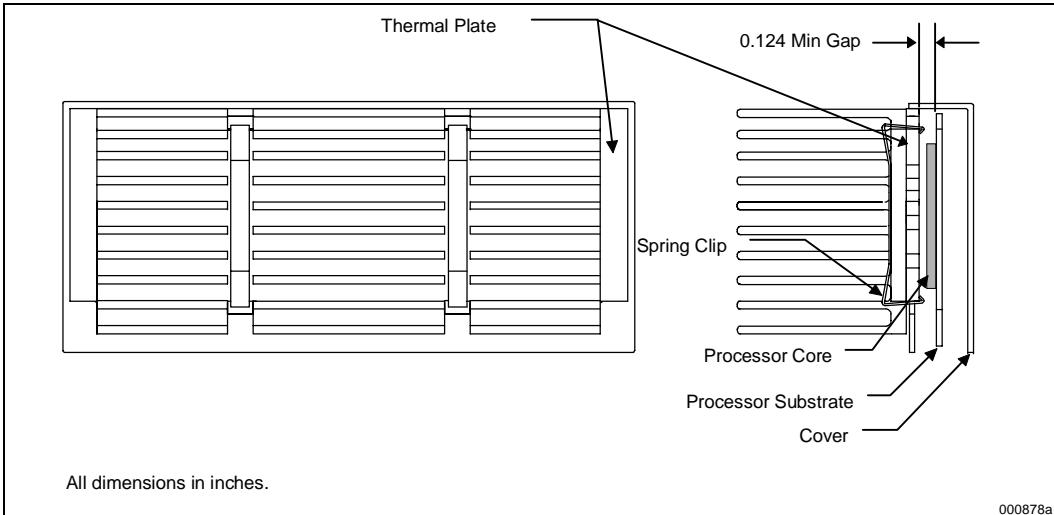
Processor with an Example Full Height Heatsink Attached using Spring Clips
